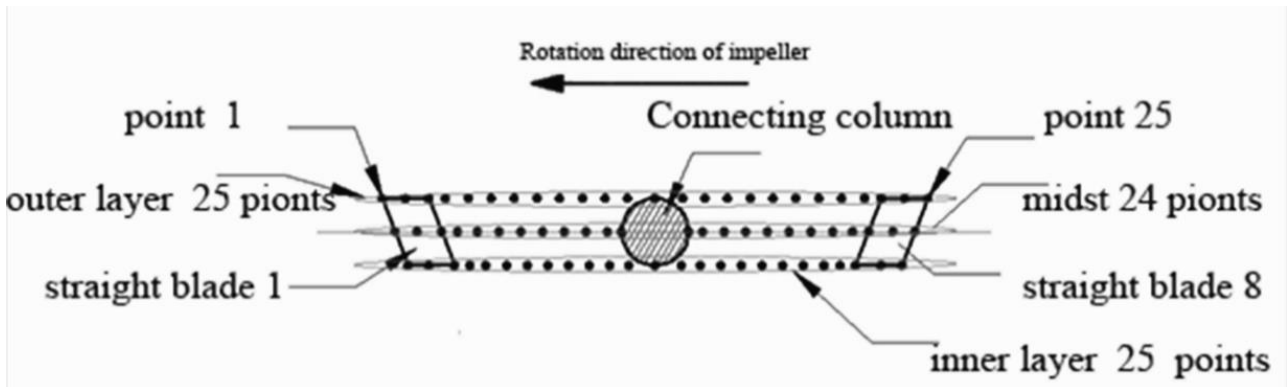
Distribution view of the position of radial measuring points inside the impeller.
